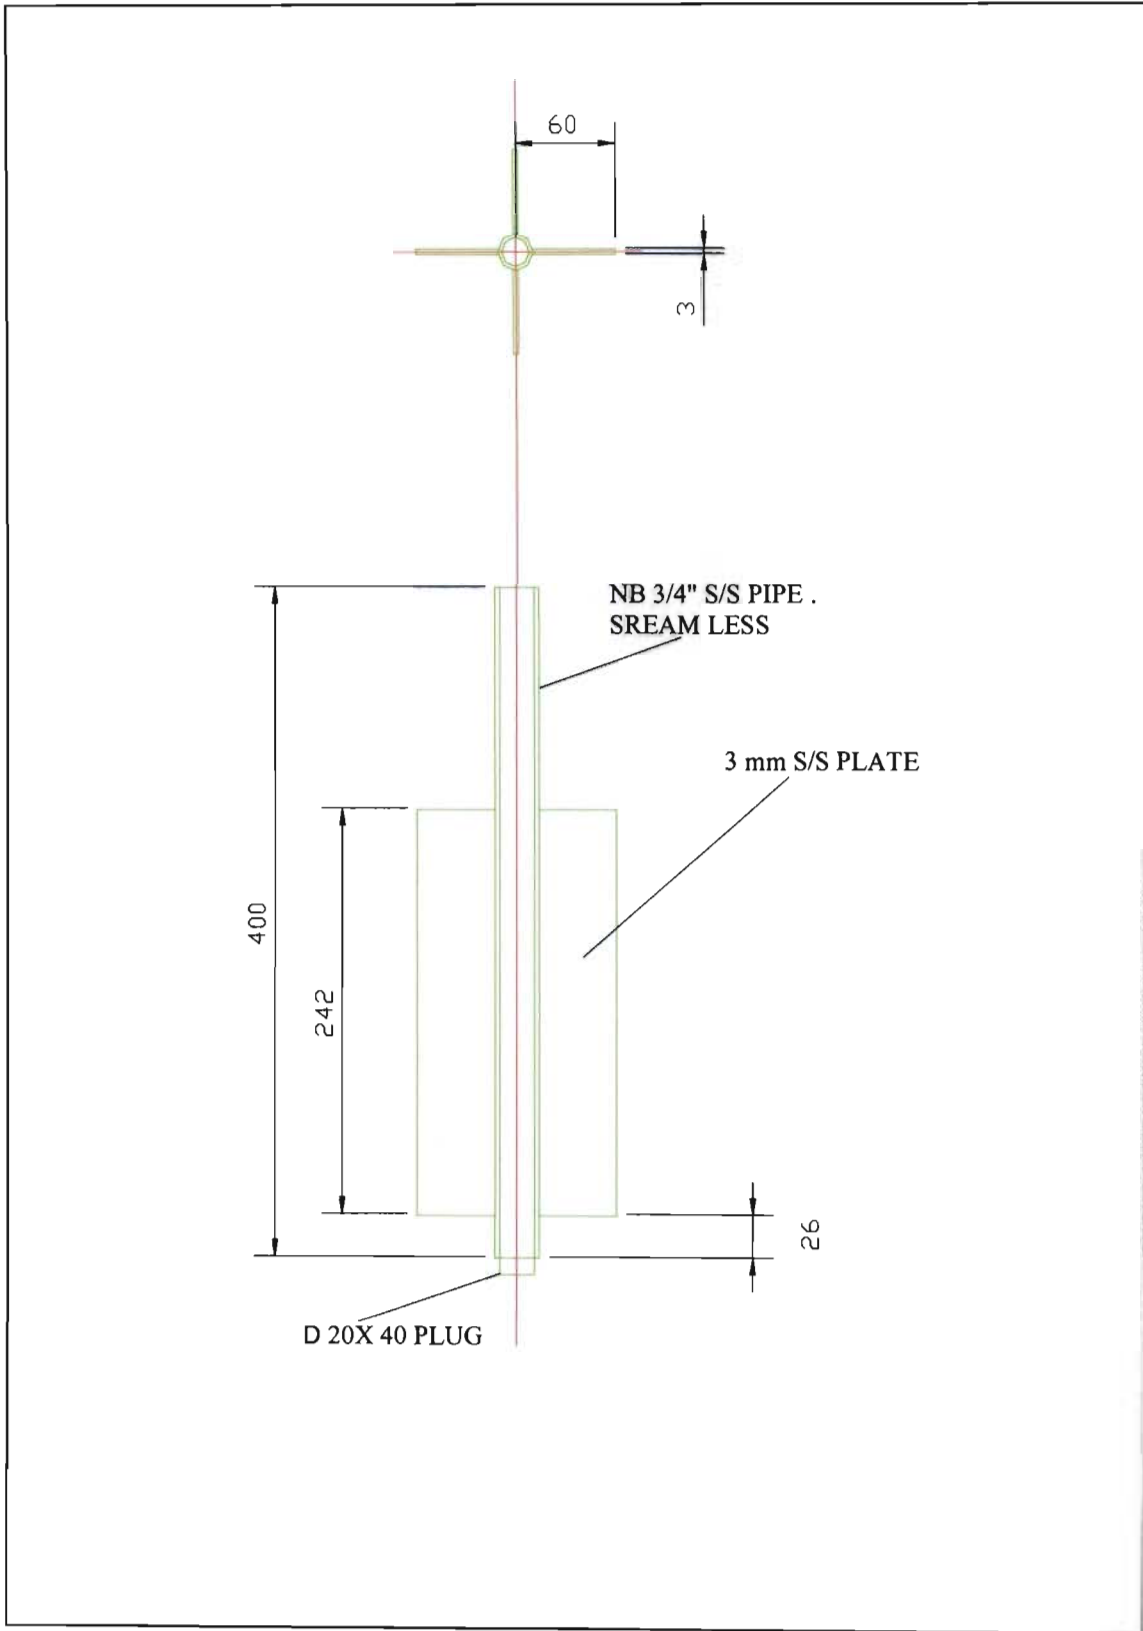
Drawing Design of Fined Heat Transfer Pipes
